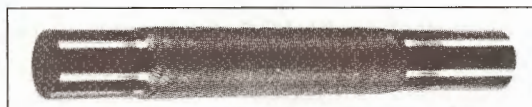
Surfaced billet of a rod of 25 mm diameter of an actuator valve with D_n 50
